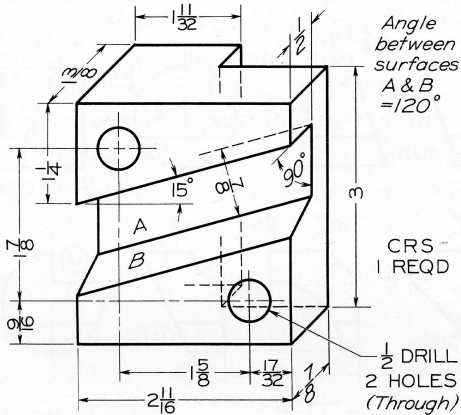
Clamp Slide. Draw necessary views completely (Layout B-3).
